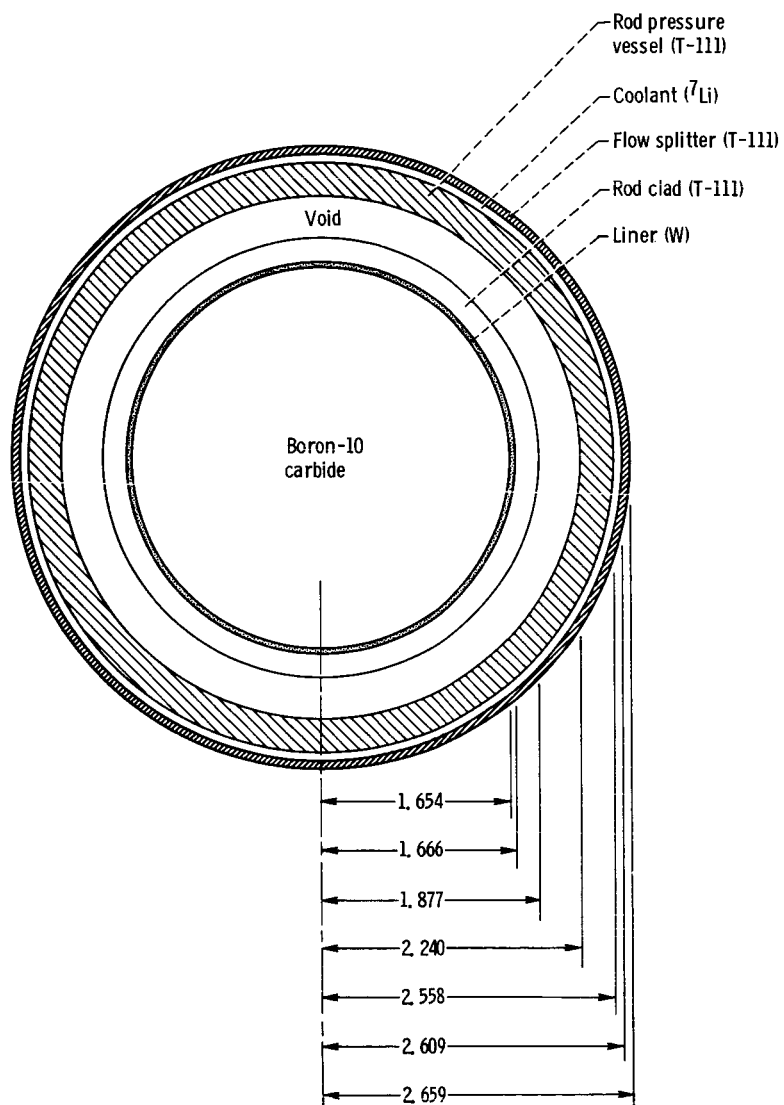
Cross section of rod and rod well for 12-rod, 337-pin reactor.
